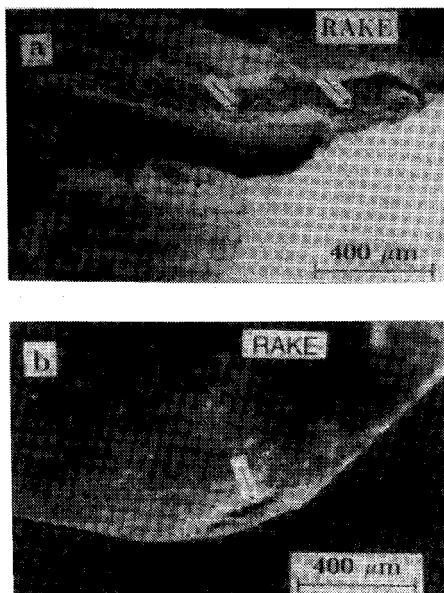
Composite tool after 8 min. of machining showing formation of crater a) before etching and b) after etching). Cutting conditions same as in Fig.14 except that the doc -1 mm.
